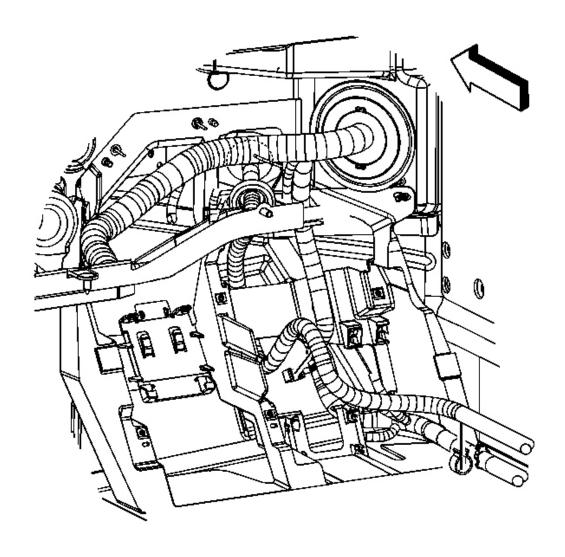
View Of Positive Cable & Grommet Courtesy of GENERAL MOTORS CORP.
